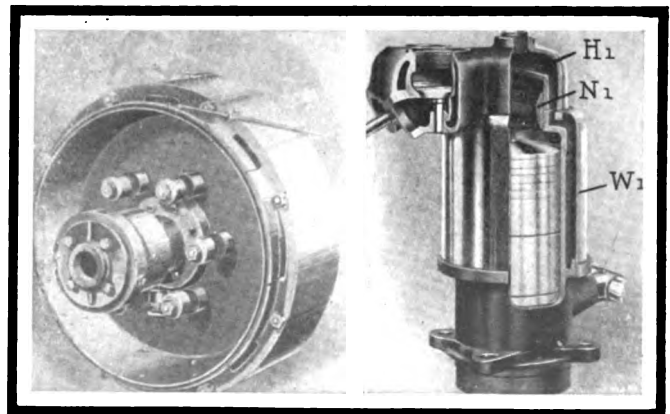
The Cadillac cone clutch with spring ring in the fly-wheel
